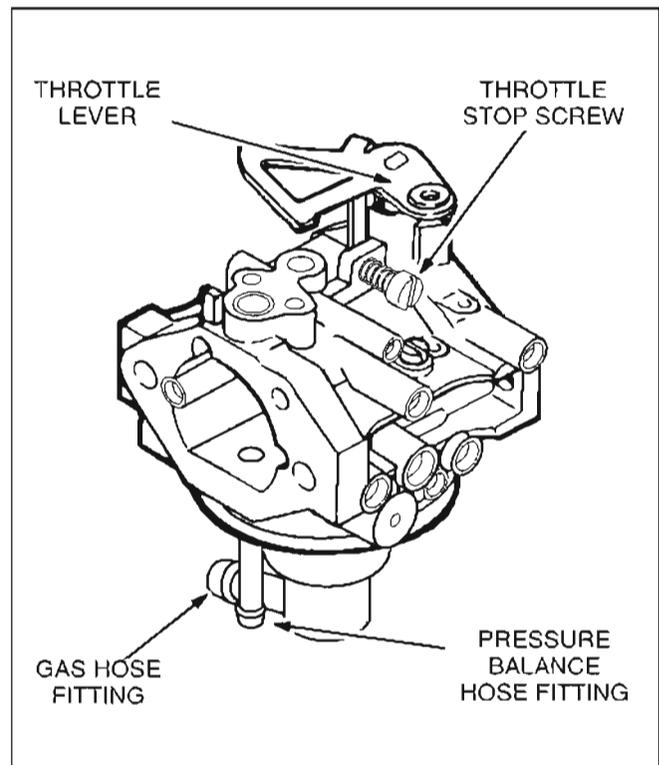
LPG CARBURETOR (BEGIN SPEC E, MODEL KV)
